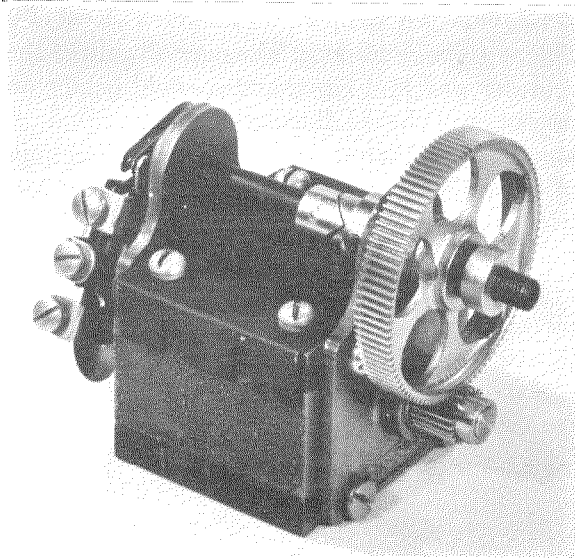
The bar-type permanent magnets of this generator are assembled with the pole pieces to provide a dustproof enclosure for the armature.
